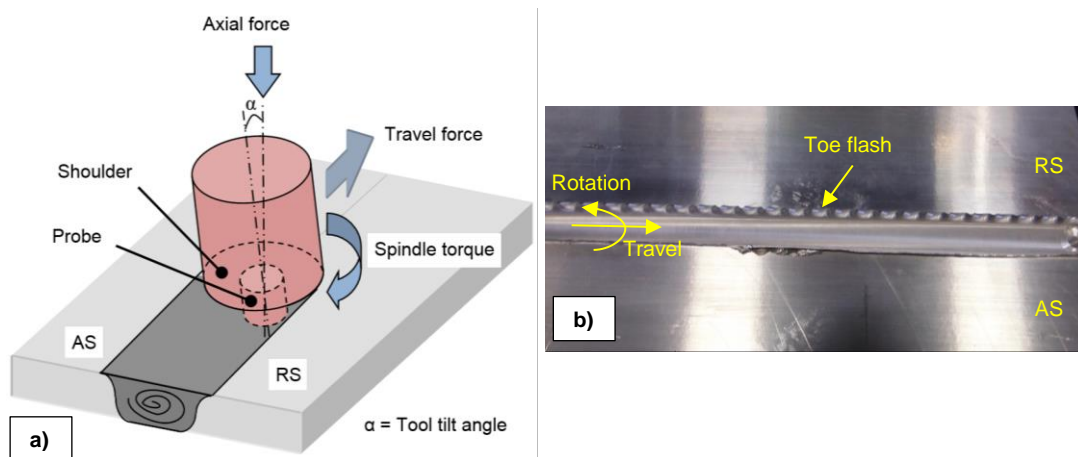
Friction stir welding a) Forging forces b) Typical FSW joint
